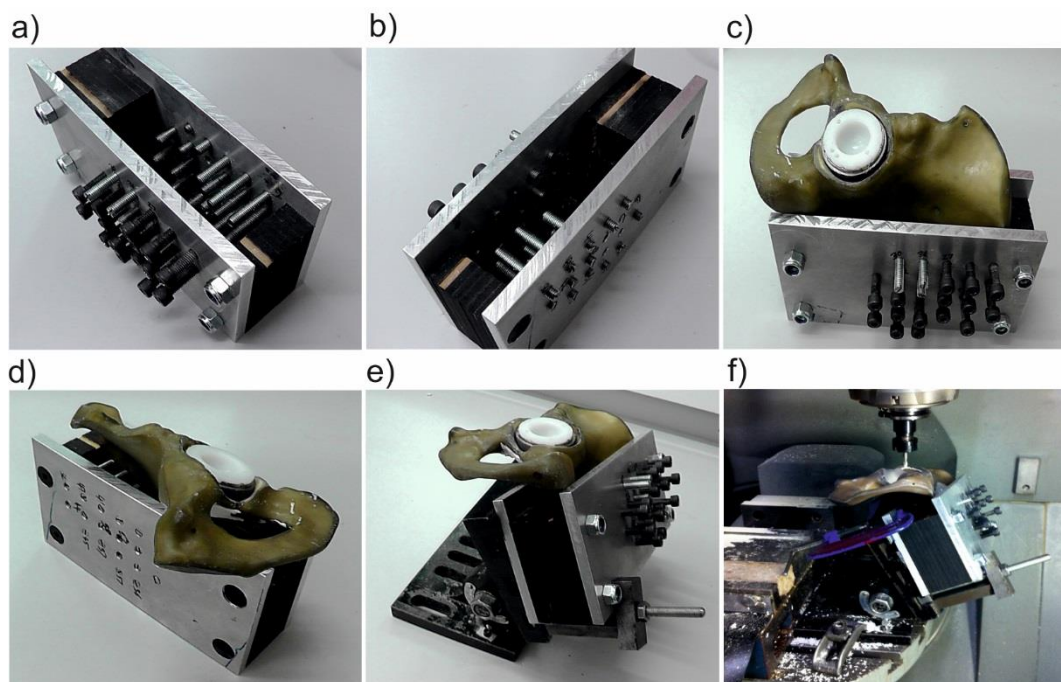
The hemi-pelvis acetabular cup cavity CNC machining process, *Graphs a, b, c and d* show the holding base and the screw formation. *Graphs e and f* show the same base being held by angle plate in preparation for the machining.
